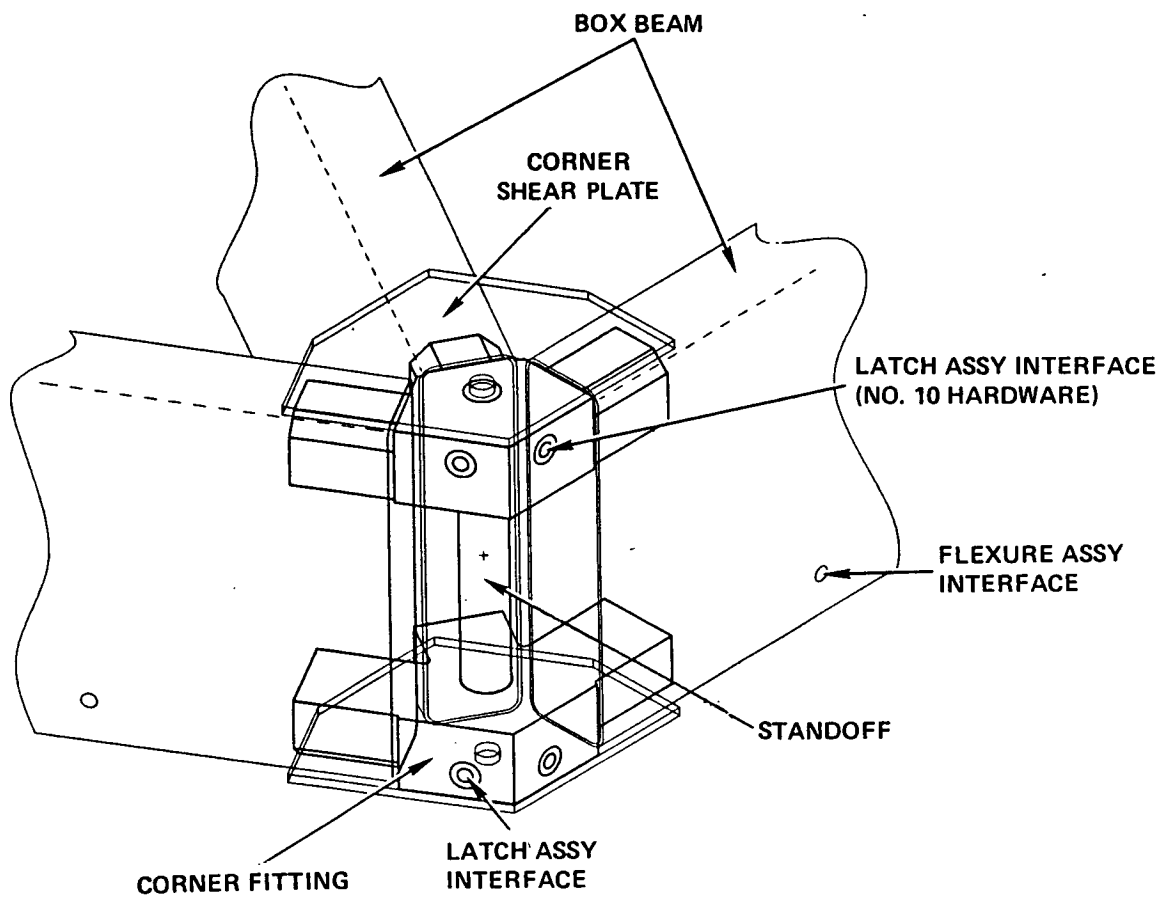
Hex Panel Corner Detail That Shows Box Beams Bonded To The Corner Fittings; and The Shear Plates Bonded To The Top And Bottom
